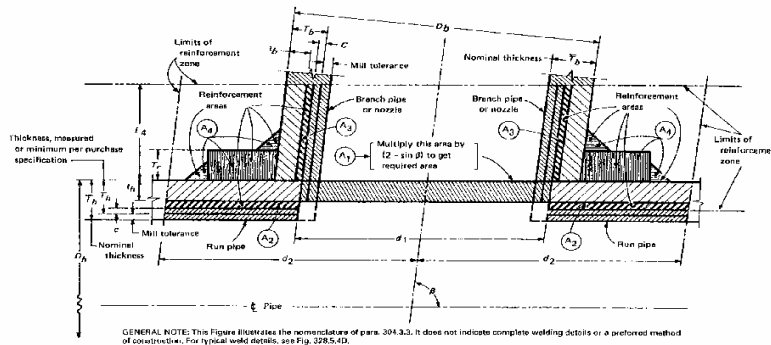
BRANCH CONNECTION NOMENCLATURE
